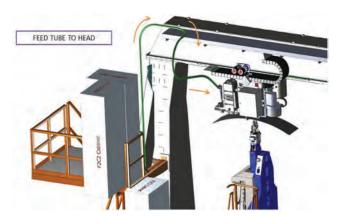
Feed Tube Path for Fastener from Cabinet to Head (Injector)
